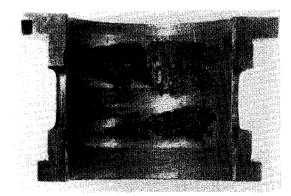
BLACKENING THOUGHT TO HAVE FOLLOWED FATIGUE FAILURE—TYPE 14 TURBO ALTERNATOR 1959
